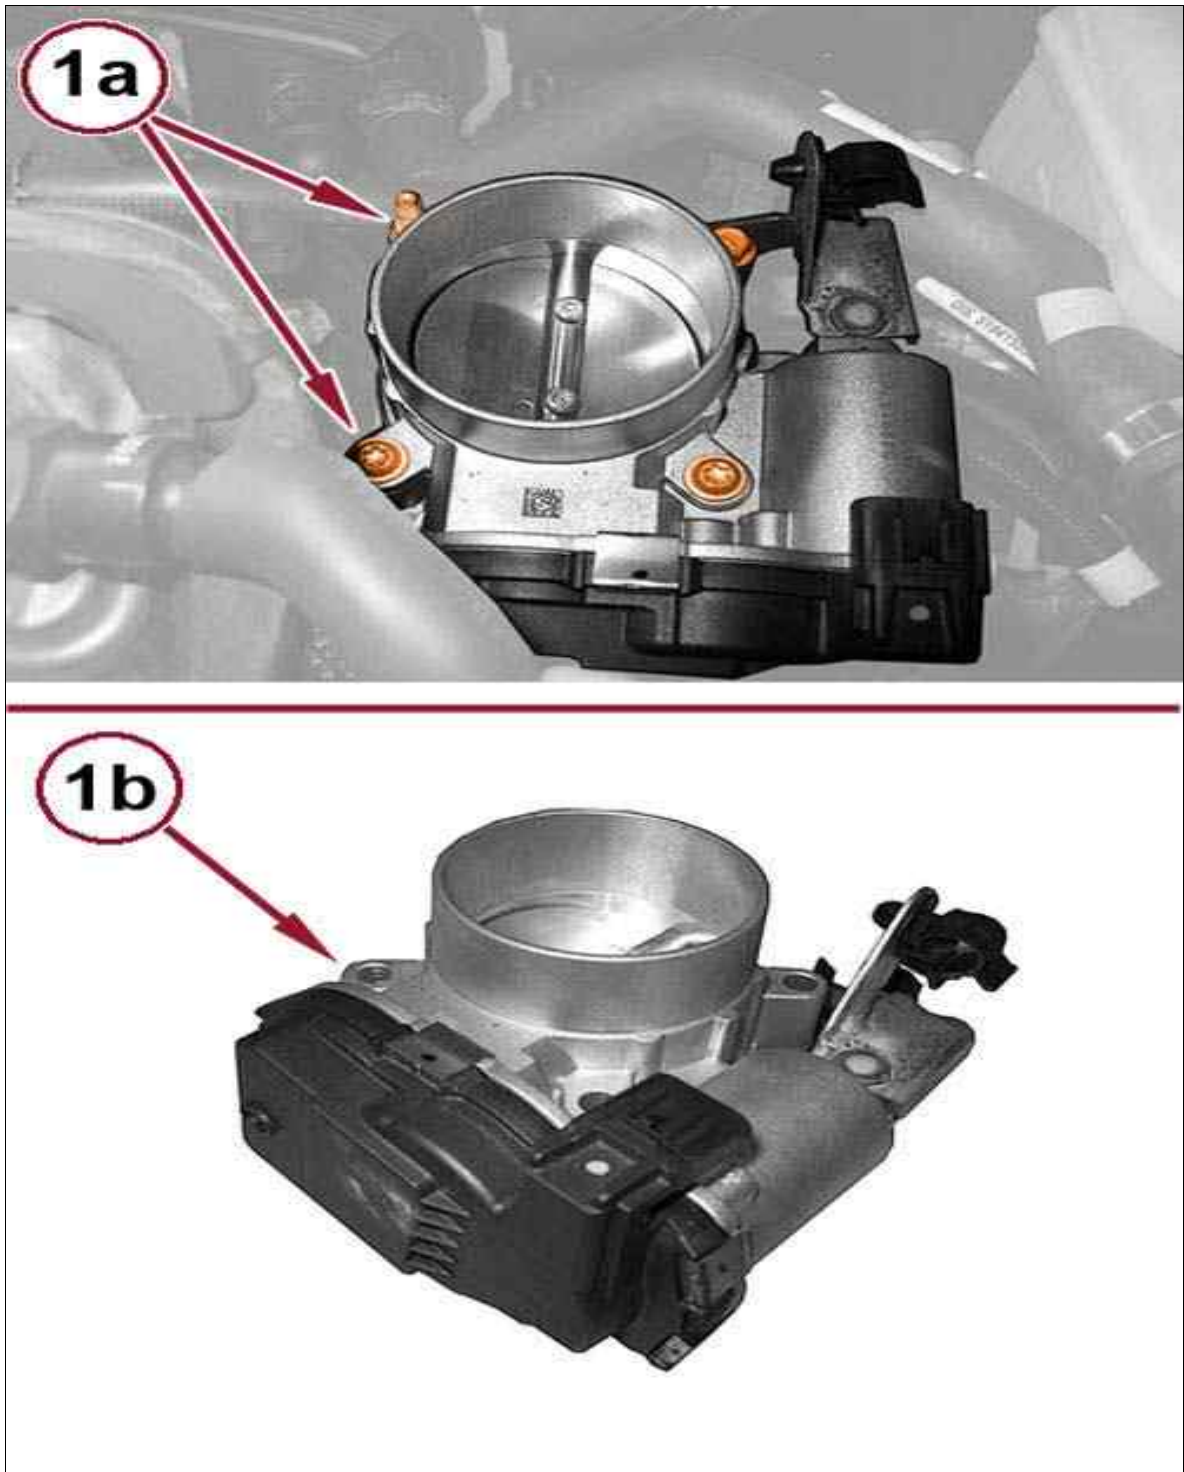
Reinforcement Bracket At Throttle Body & Fastener
